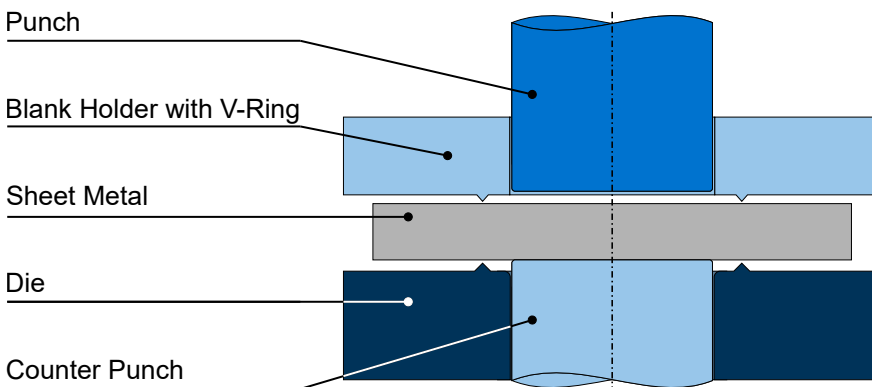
Tool setup of fineblanking with a v-ring on both blank holder and die.
